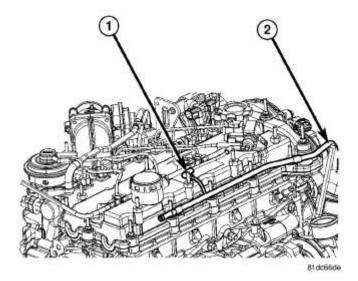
VACUUM SUPPLY TUBE Courtesy of CHRYSLER LLC
